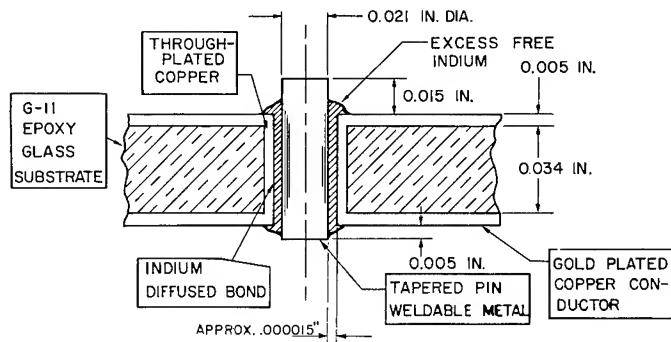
Drawing shows cross section of "Fusicon" pin technique. The diffusion alloy is shown in exaggerated scale.
